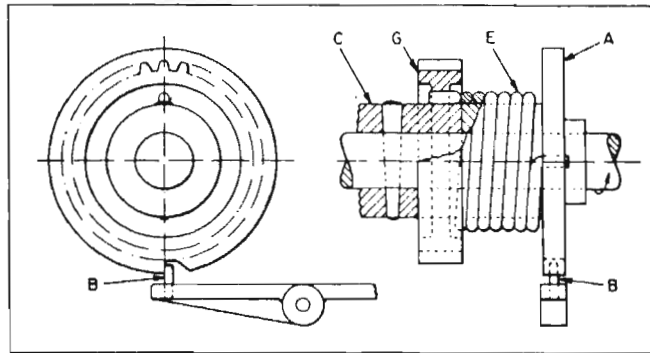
Spring Type of Clutch which Automatically Disengages After Making One Revolution
